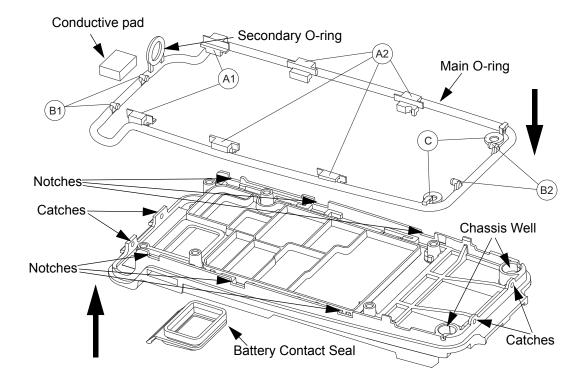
O-ring, Battery Contact Seal and Conductive Pad reassembly.
